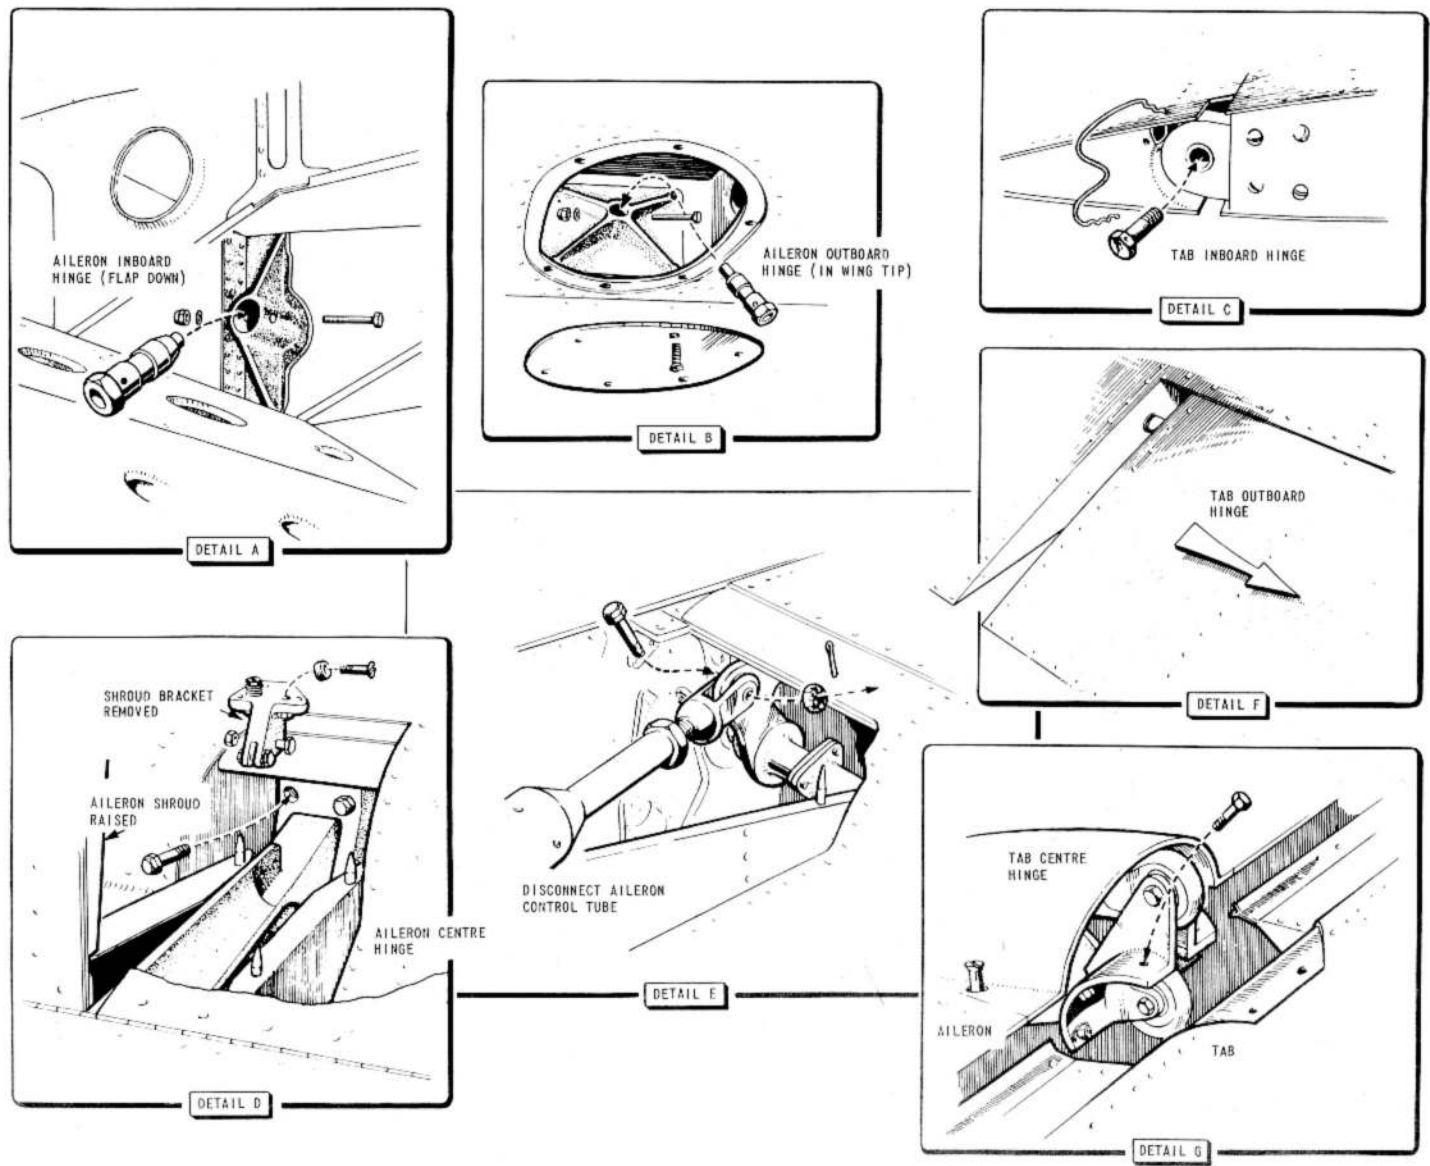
AILERON AND AILERON TAB-REMOVAL AND ASSEMBLY
